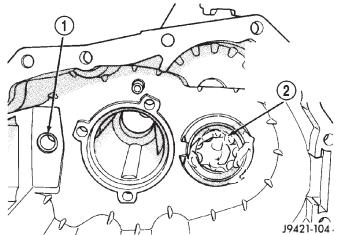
Countershaft Rear Bearing Seated In Seated in Race
